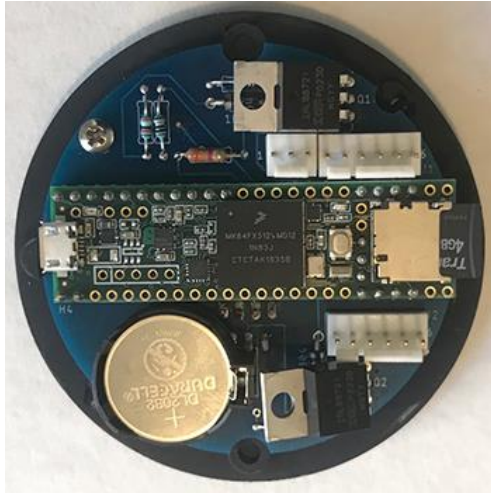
Install the coin cell holder and solder the pins on the bottom of the board then install the Teensy microcontroller and solder the pins. The finished circuit board is installed onto the 3D printed faceplate.
